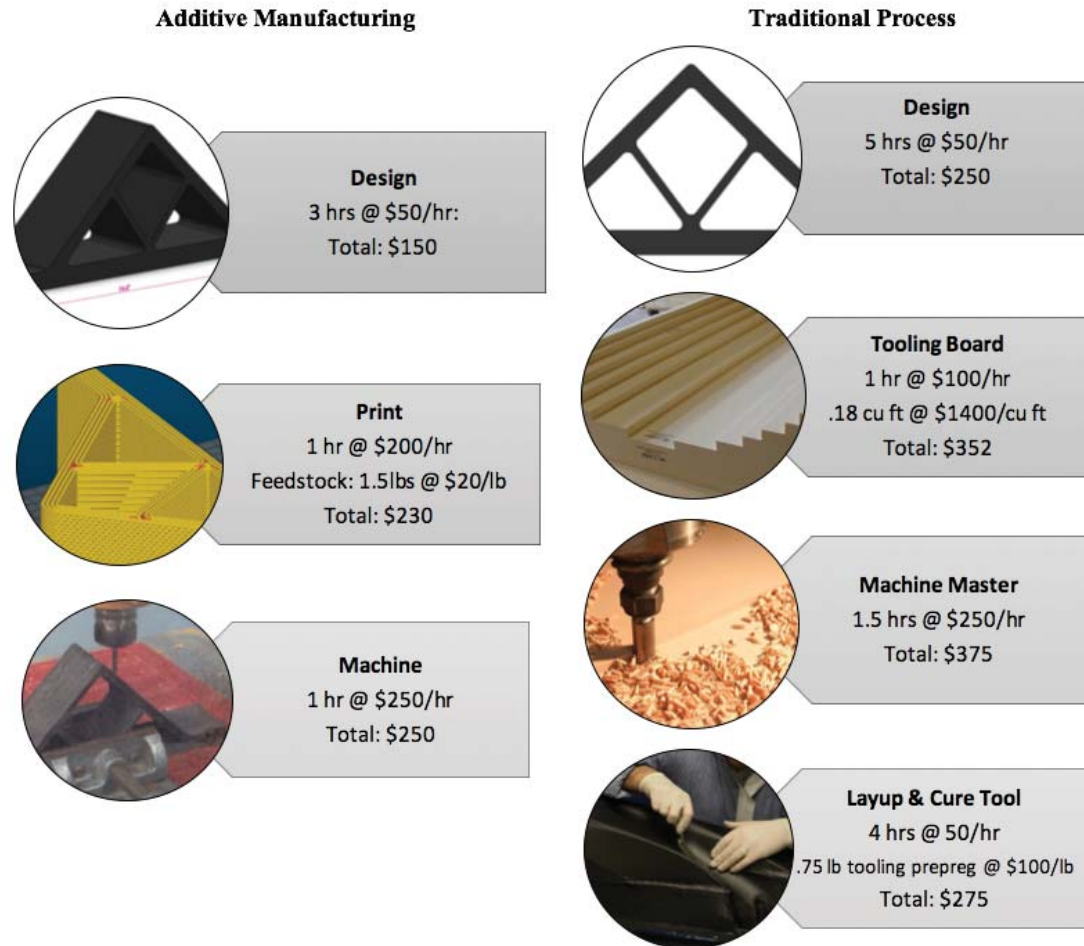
Process steps and inputs for manufacturing the A-frame tool using AM and a traditional carbon fiber tool manufacturing process.
